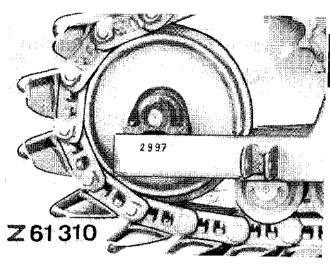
Serial Number of Track Assembly, L.H. Side
